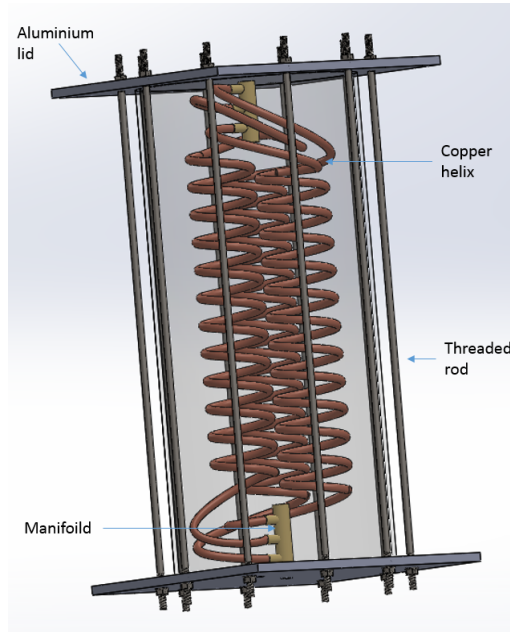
Model of the cooler. The shell is made transparent to show the copper helix inside.
